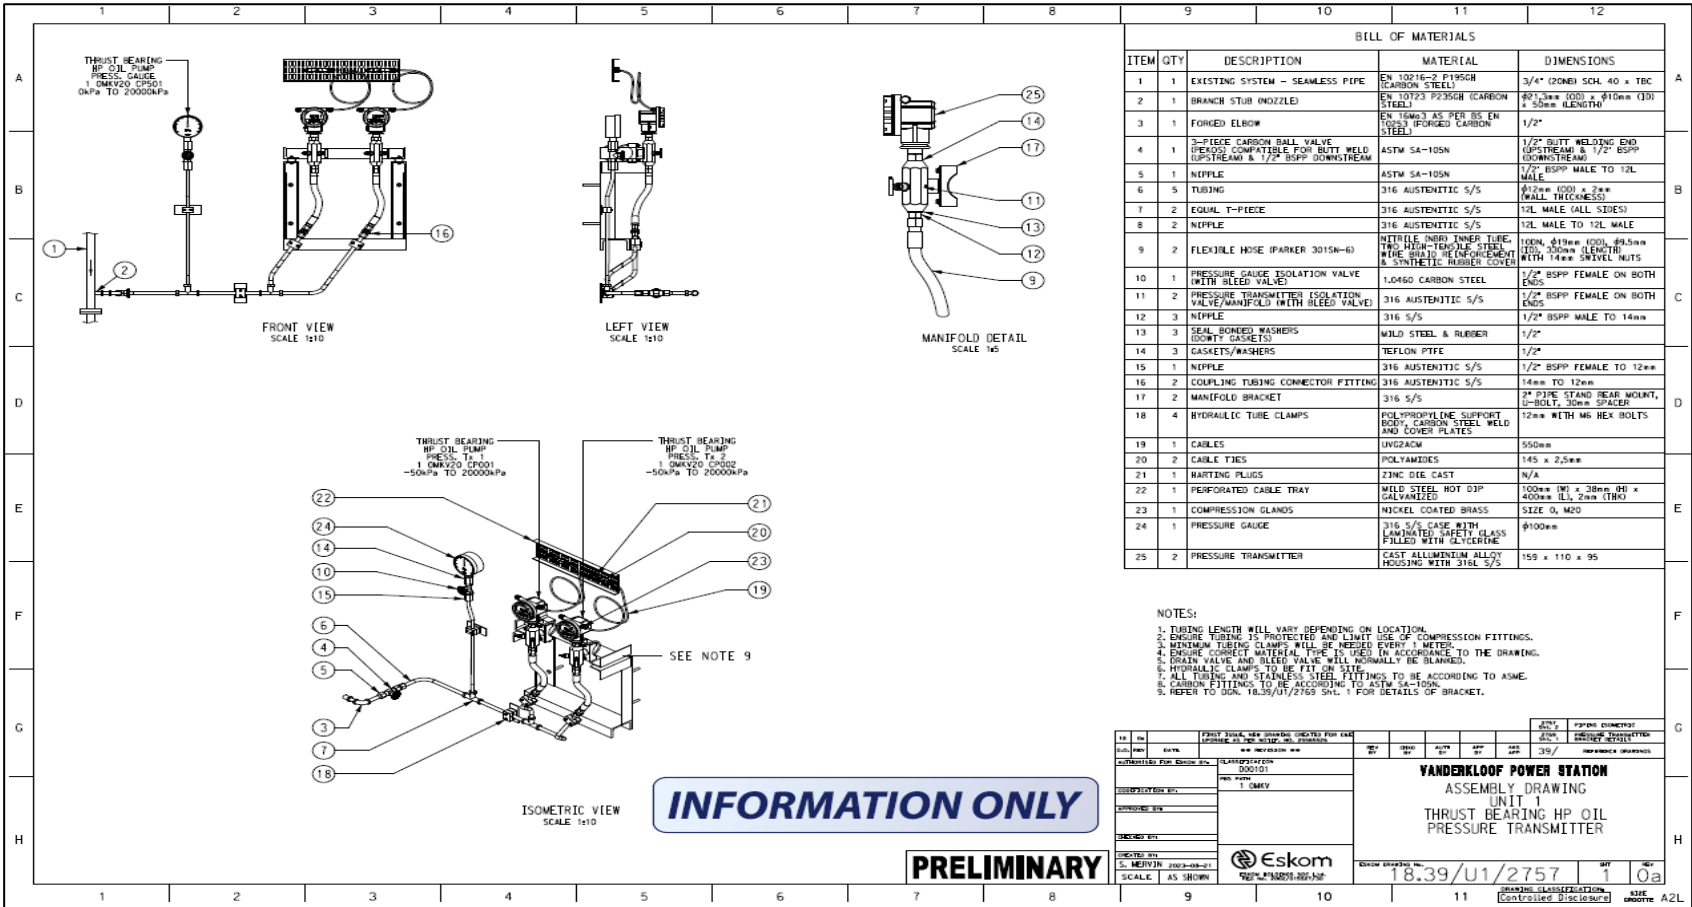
Assembly Drawing Redundant Pressure Transmitter and Gauge
